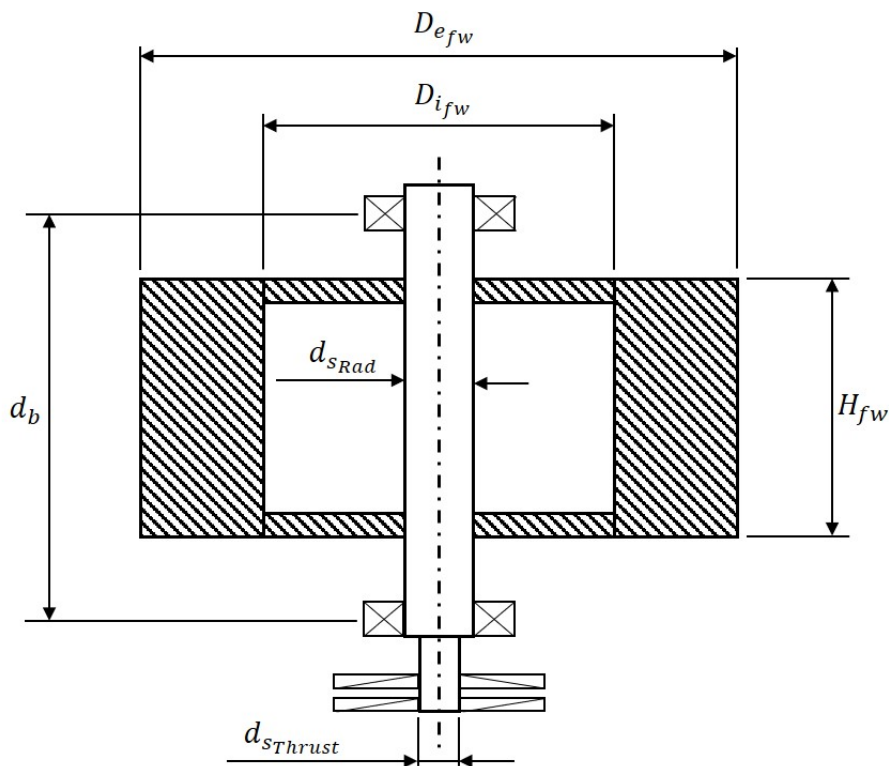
Sketch of the flywheel and its geometrical parameters.
